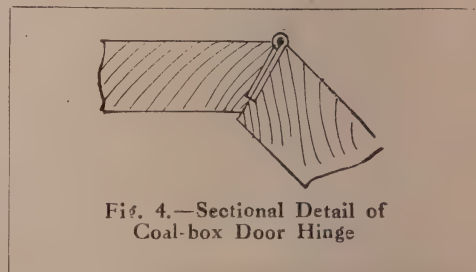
Sectional Detail of Coal-box Door Hinge
